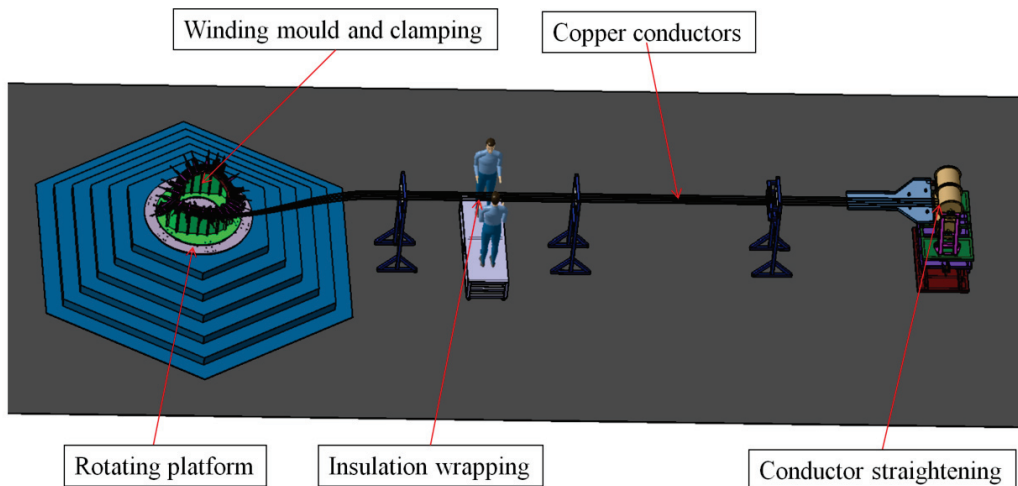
Conceptual design of the coil winding manufacture line.
